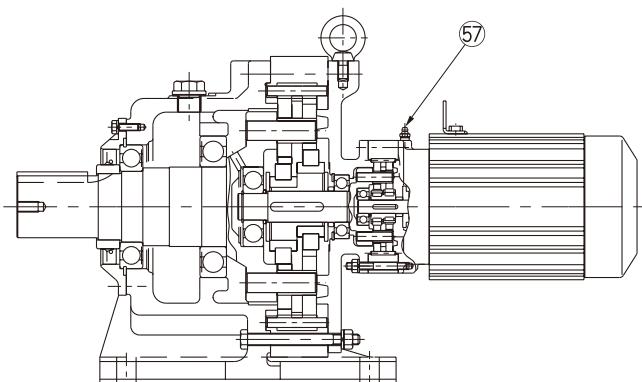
Type CHHM (Horizontal, Gearmotor)
